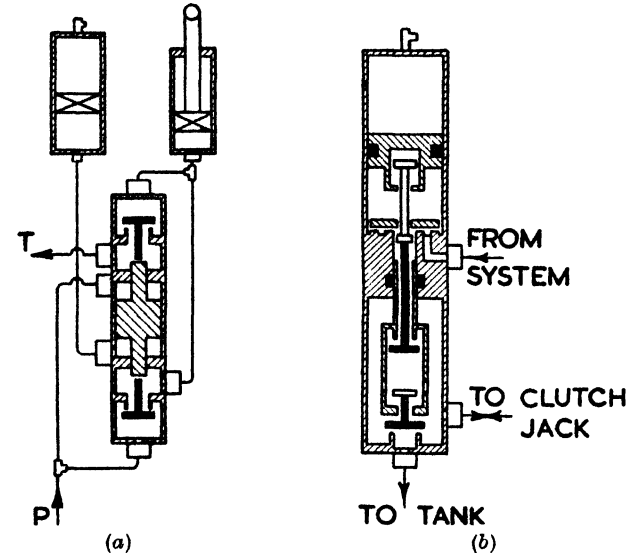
PUMP CLUTCH CONTROL VALVES—CLUTCH PRESSURE ENGAGED
